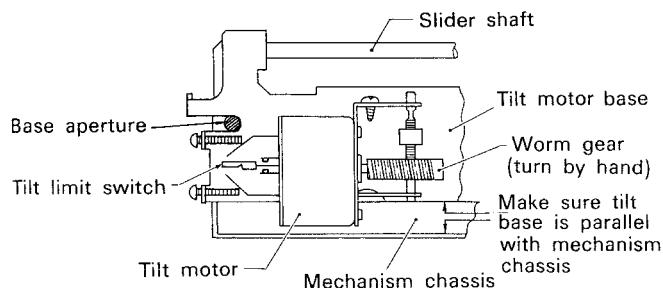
Parallel alignment of the lower surface of the tilt motor base and rib section of the mechanism chassis
